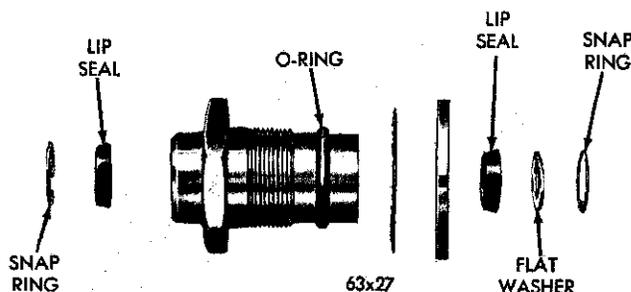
Piston Guide Nut Assembly (Disassembled)
